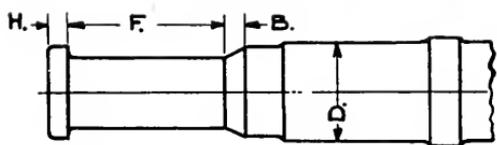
Built-up Dimensions of Axle by Arc Welding
